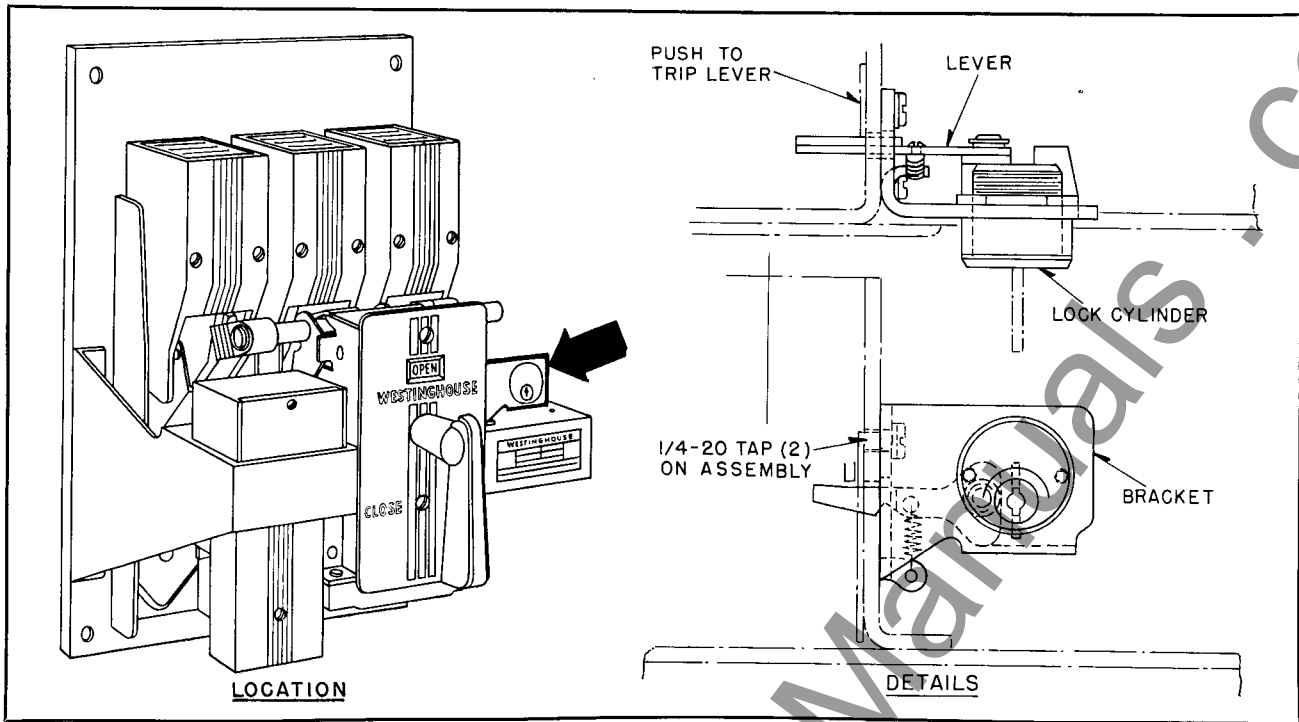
Electric Lockout Attachment—Location and Construction Details
